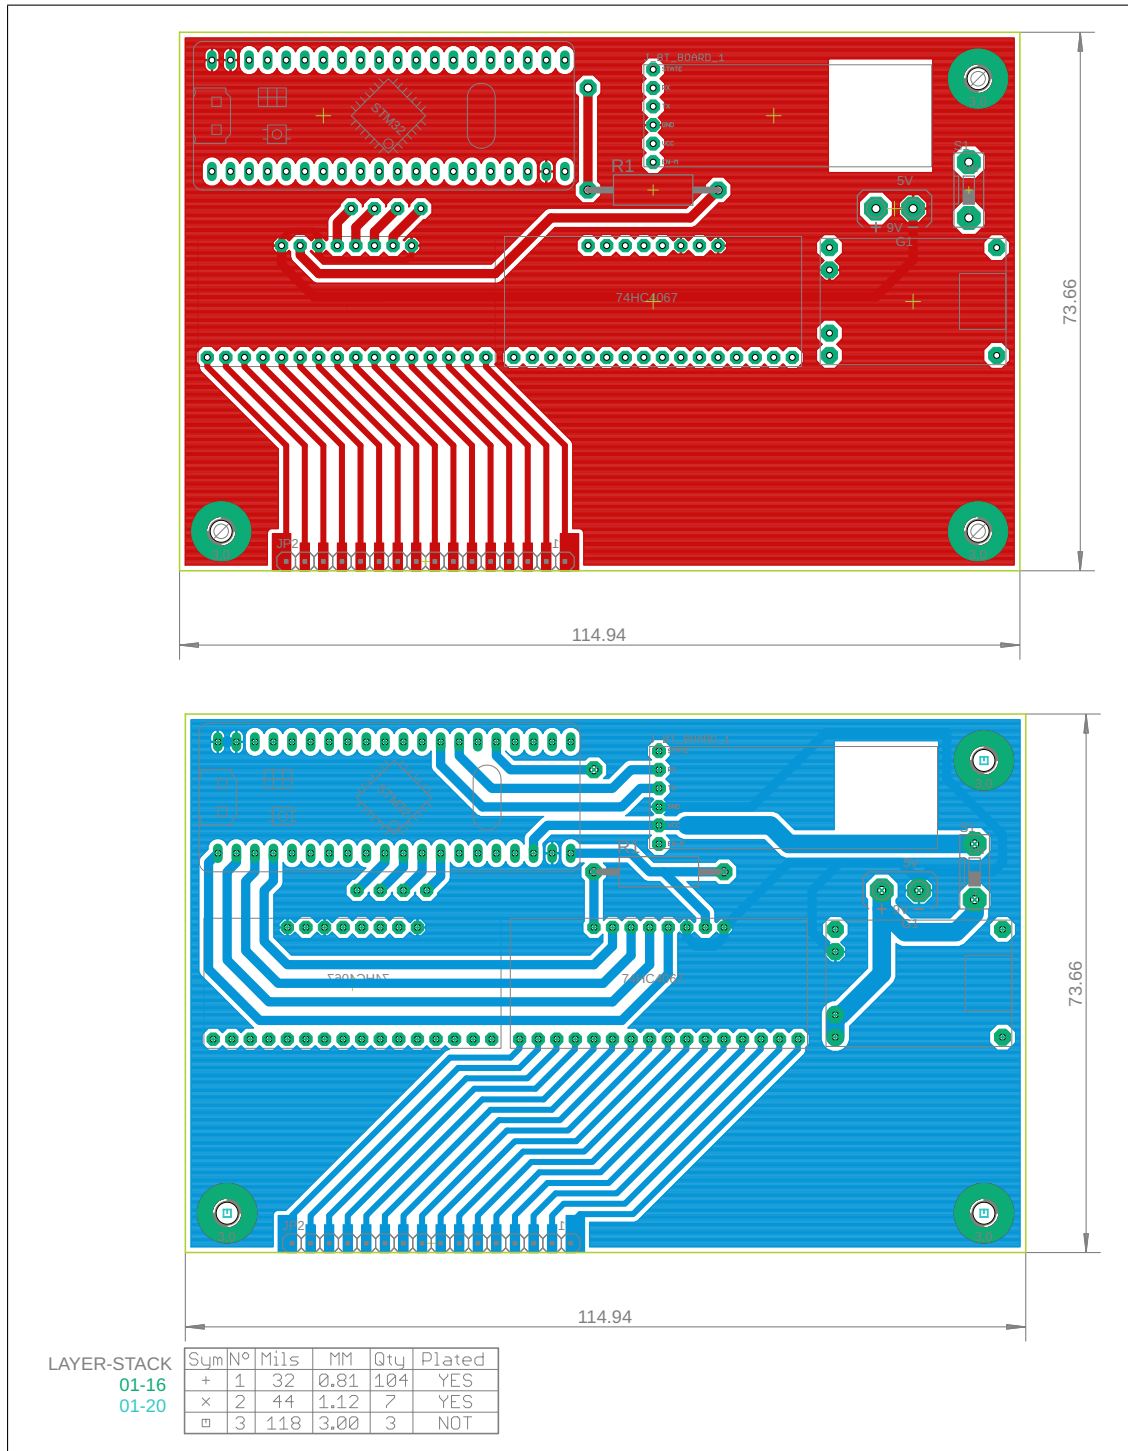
PCB of the DAQ of the PSM (units in millimeters)
